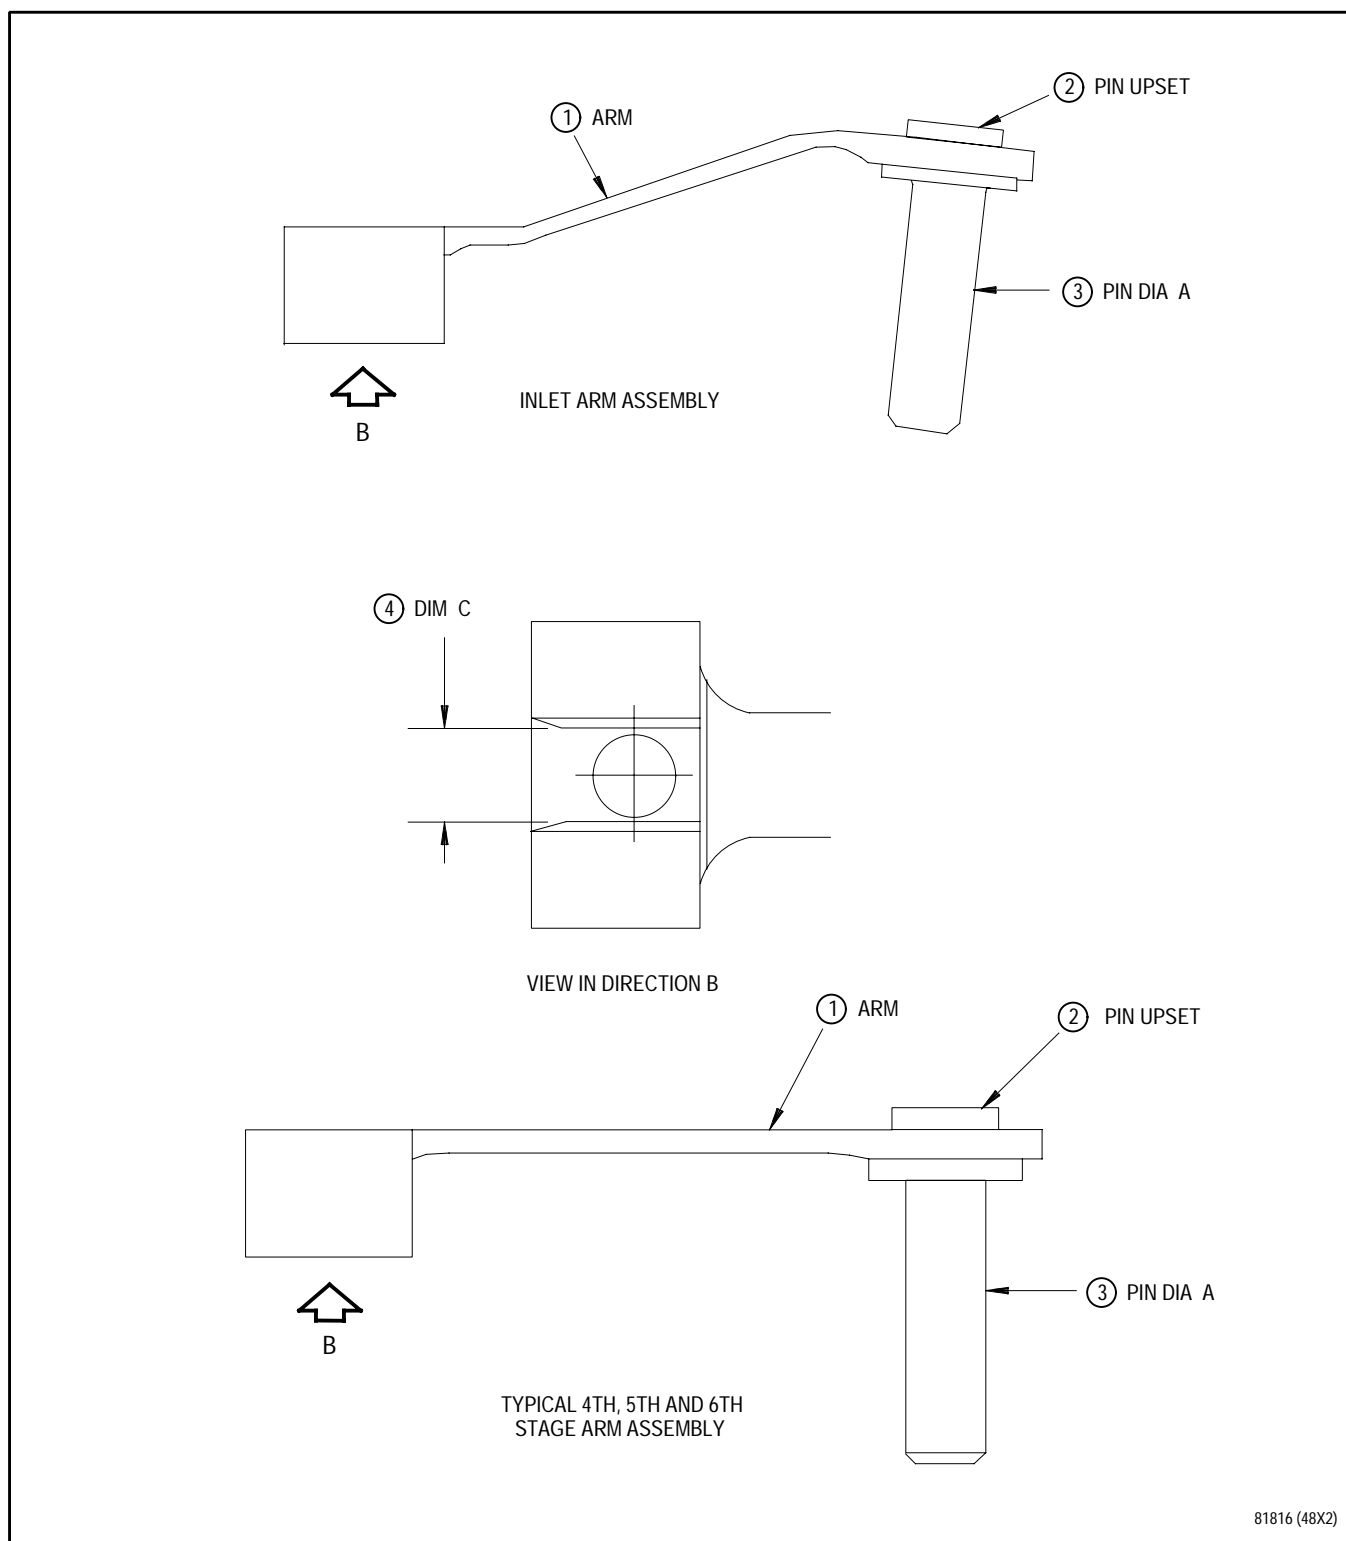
Inlet, Fourth, Fifth, and Sixth Stage Rear Compressor Stator Arm Assemblies - Inspection
